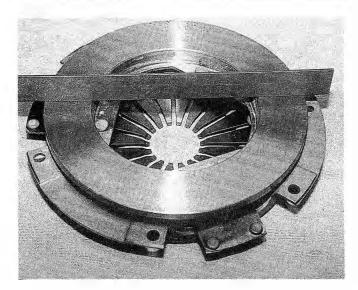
Clutch pressure plate friction surface being checked for flatness using straightedge.
